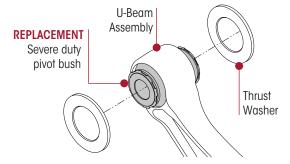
Severe-duty Pivot Bush Thrust Washer Assembly
